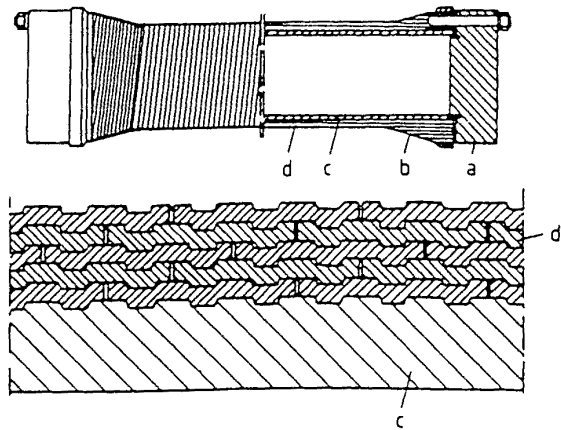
Pressure vessel produced by the BASF strip-winding process showing a sectional view of the wound wall
